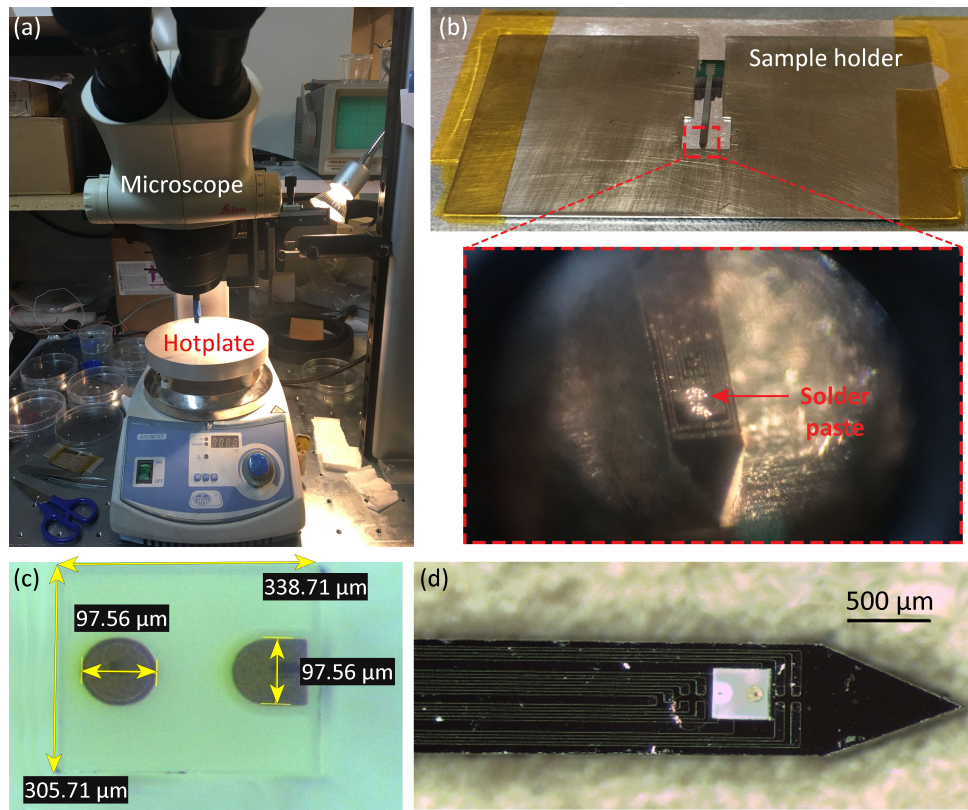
LED coupling into the optrode shaft. (a) Setup includes a microscope used for guidance as the LED chip is manually placed into LED contact pads. The hotplate is used to heat the optrode shaft and to weld the solder paste. (b) Optrode shaft holder that avoids probe movements during the process. (c) Dimension measurements of a LED chip encapsulation and pads; (d) LED chip coupling result.
